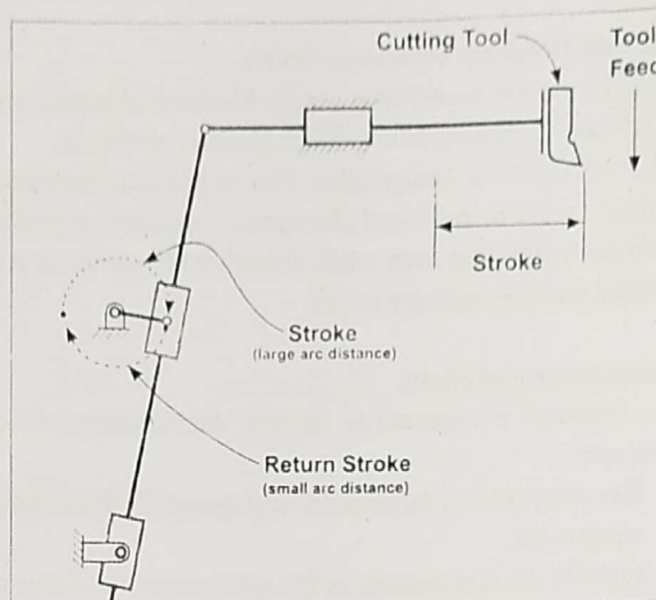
Schematic of the quick return mechanism used in shaper machine
